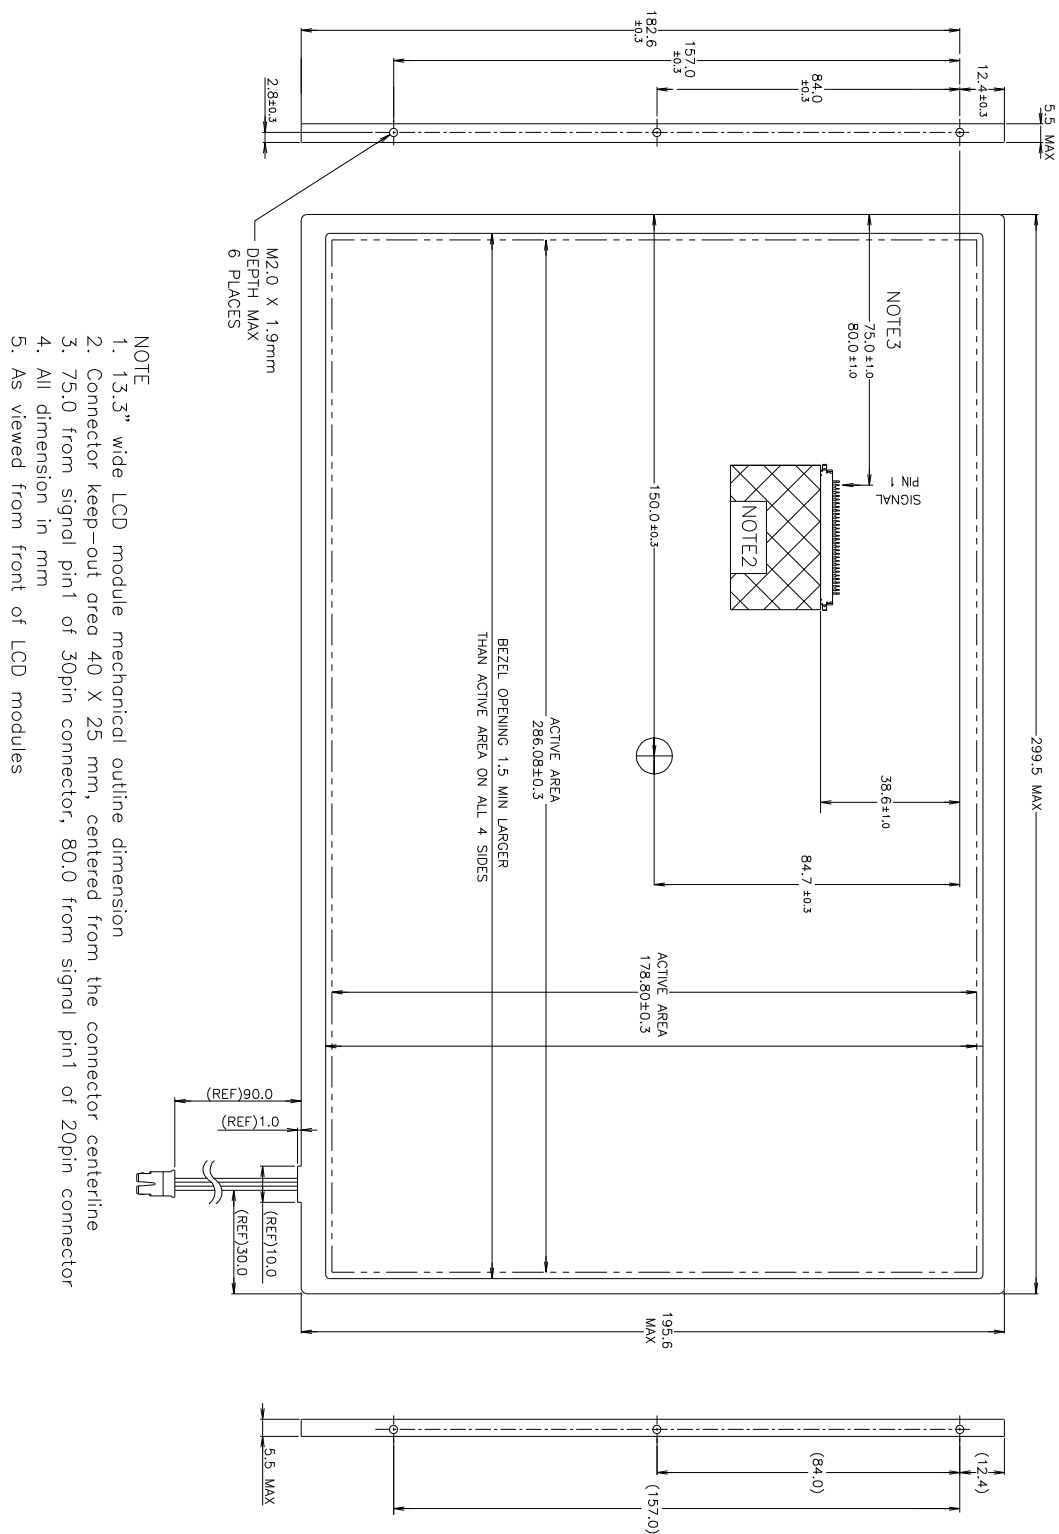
13.3-inch Wide Single CCFL Mechanical Outline Dimension (Front View)
